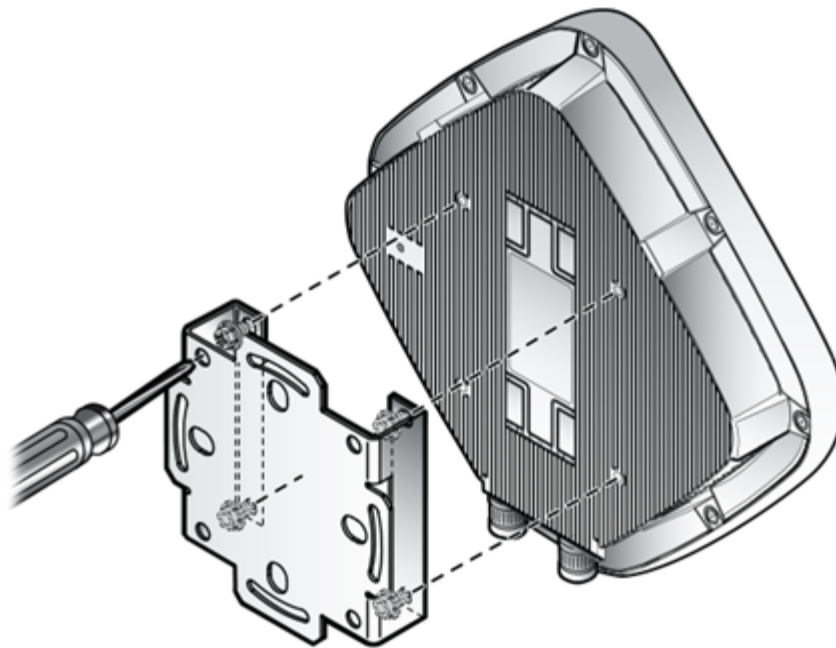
ACC-MBO-KT-AX adapter bracket attachment to an outdoor access point
